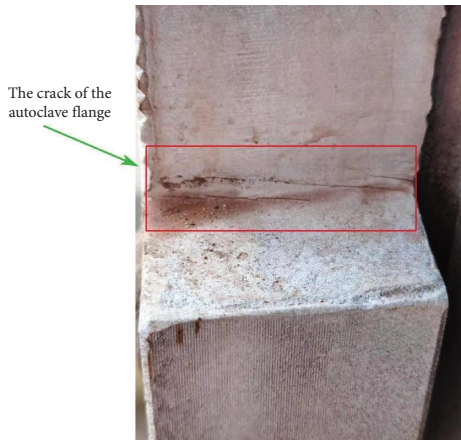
Crack at the root side of the autoclave flange tooth.
